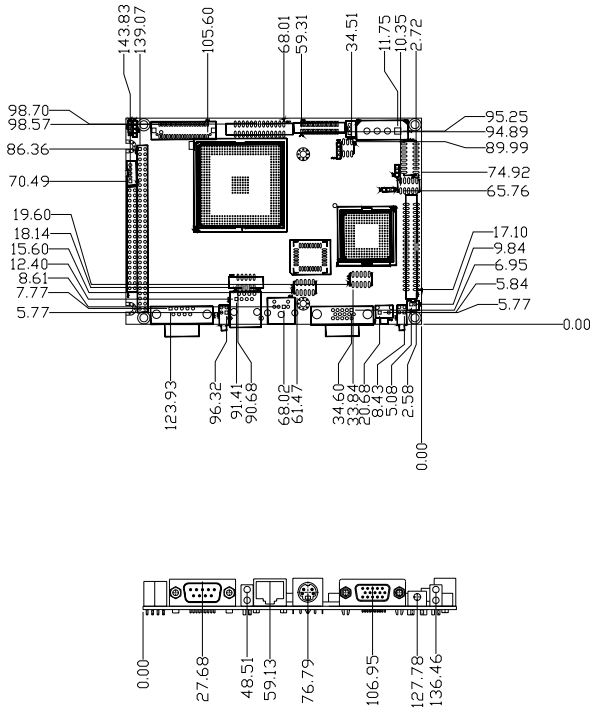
PCM-9375 Mechanical Drawing (Component Side)
